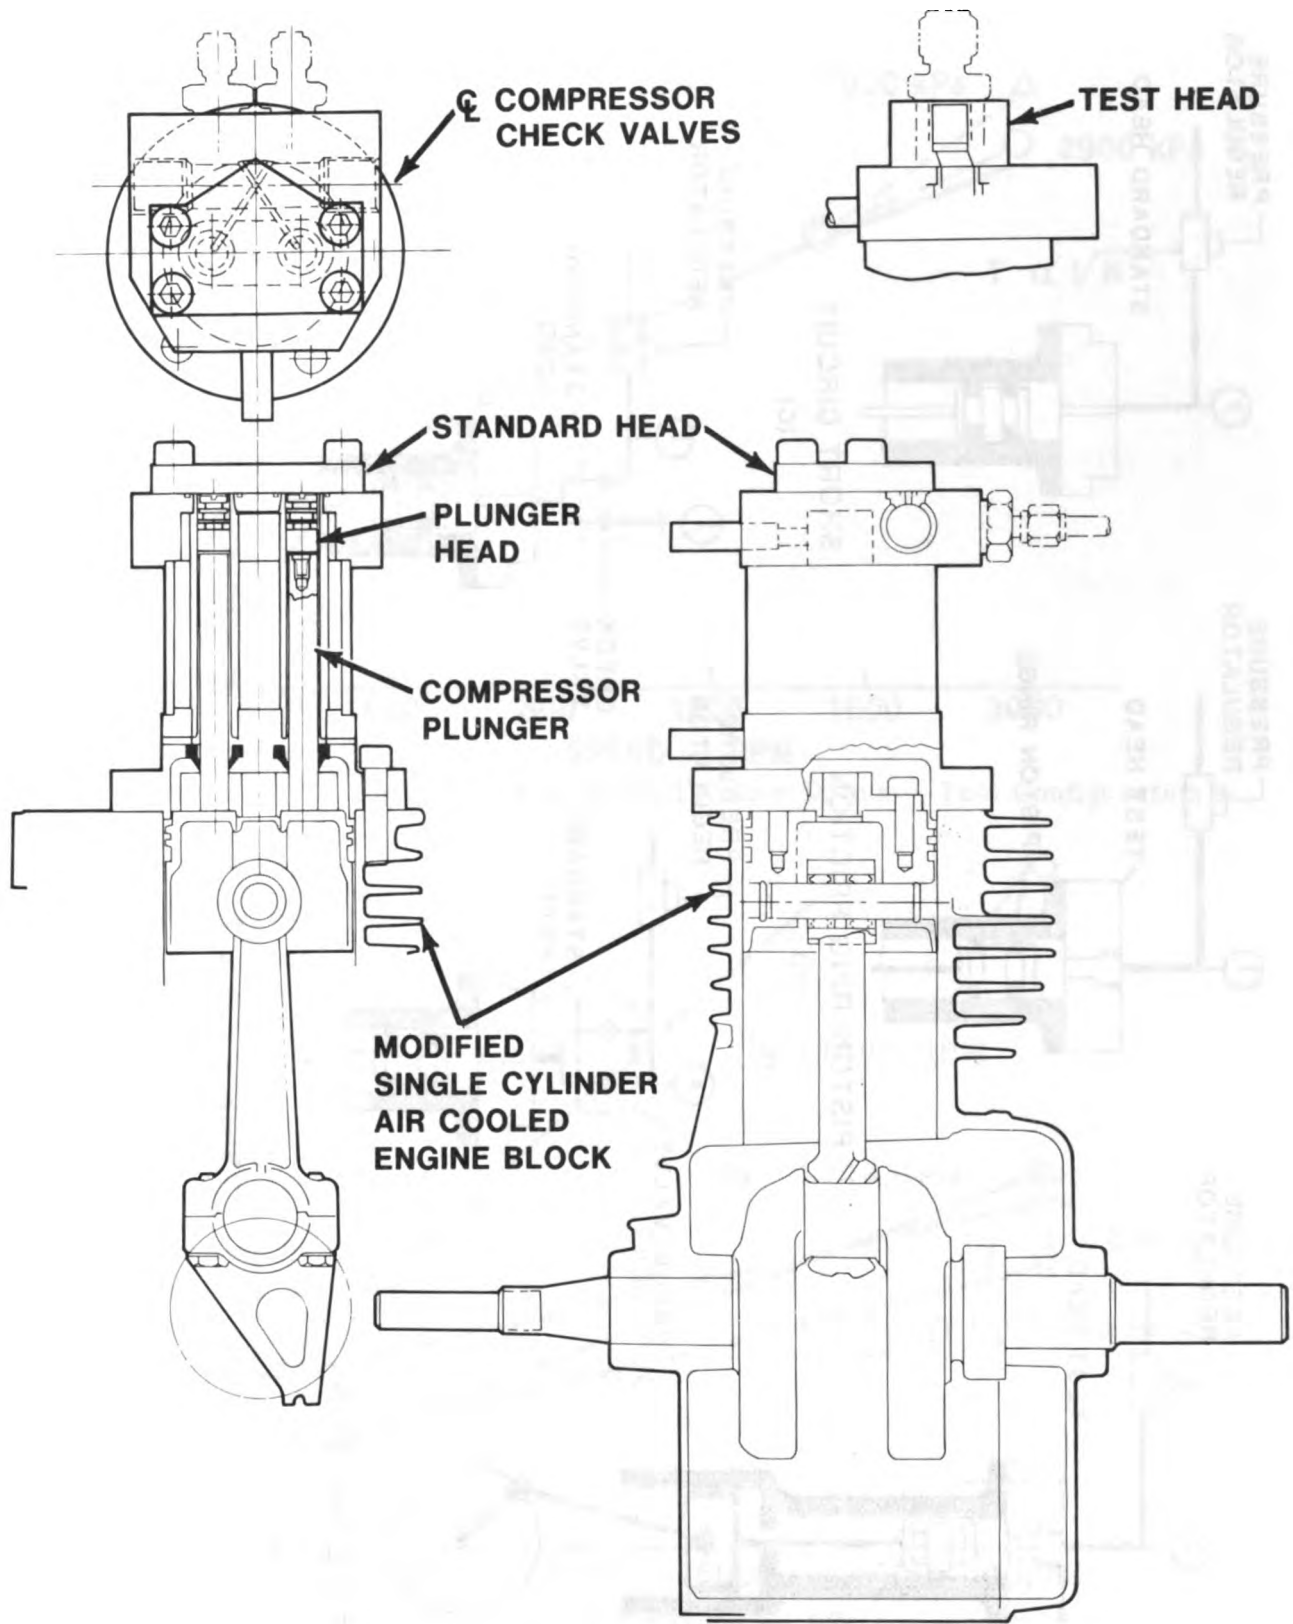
Compressor Plunger Seal Test Fixture
